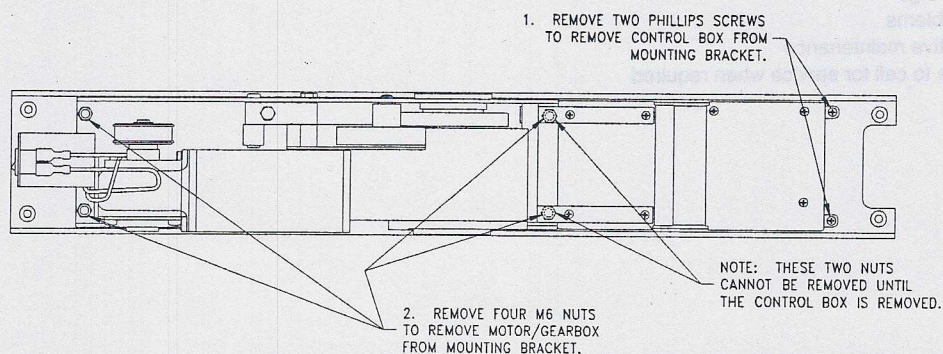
MOTOR/GEARBOX & CONTROL BOX REMOVAL
